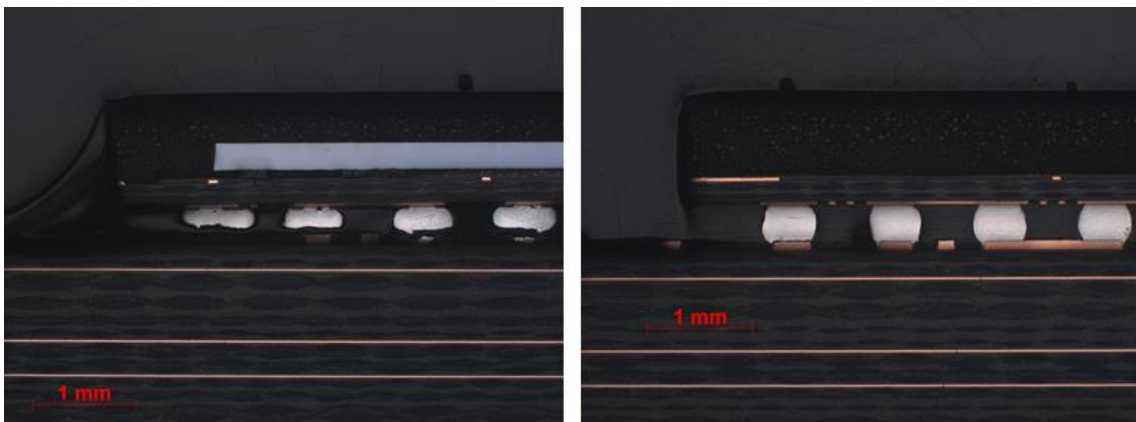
8: Failure of SAC305 BGA with acrylic coated using a) standard spray and b) Thick application from -55°C to 125°C.
